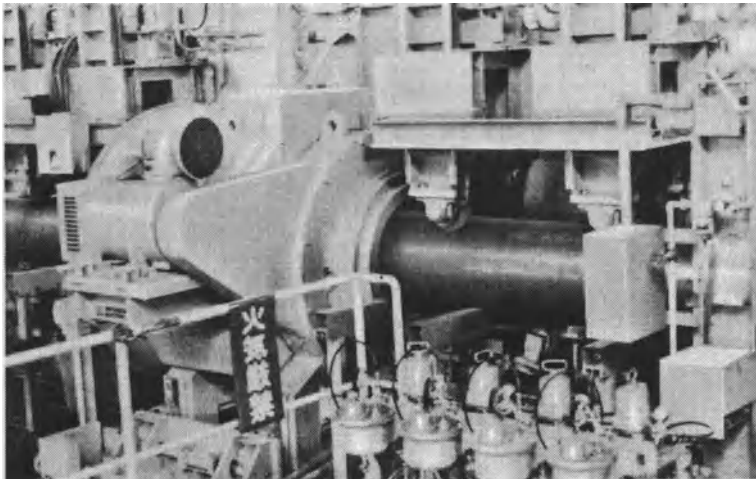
Rotating probe tube-testing installation for seamless and welded large tubes up to 600 mm diameter (design Mitsubishi)
